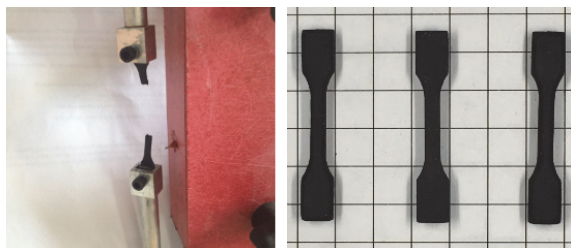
Flaw size and crack nucleation test machine²⁶⁾ and simple tension specimens
